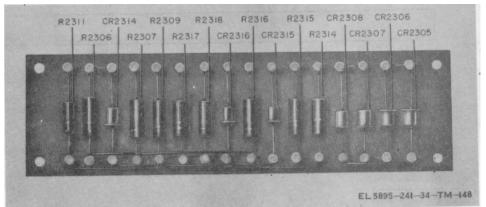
Power Supply PP-2795/FSW-8, terminal board TB2801, parts location.
